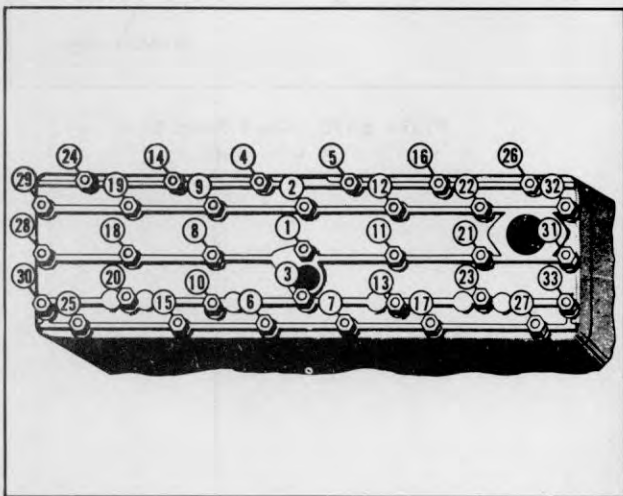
Cylinder Head Stud Nut Tightening Sequence
